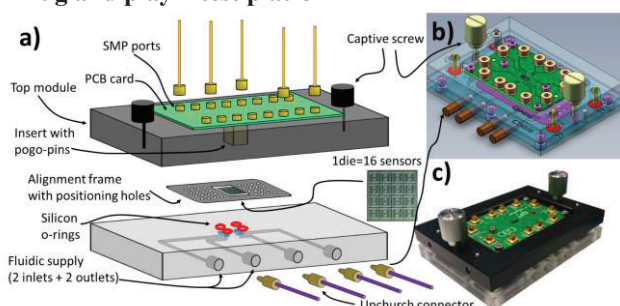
(a) Exploded view drawing of the platform, including the top piece for electrical connection, bottom piece for fluidic delivery and the intermediate alignment frame. (b) CAD three-dimensional diagram of the platform. (c) Optical photograph of the platform with transparent PMMA lower piece.
